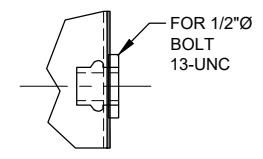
DETAIL D - BRACED POST INSULATOR BRACKET N.T.S.
